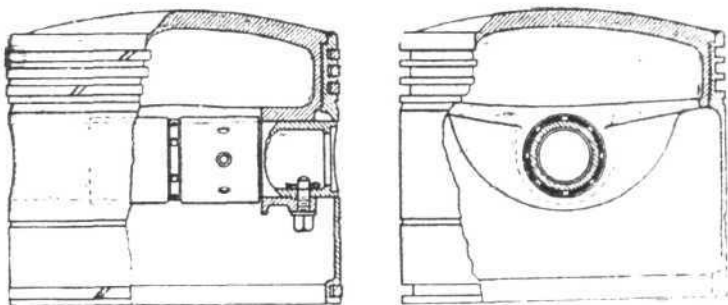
Arrangement of piston, gudgeon pin, and bush.
